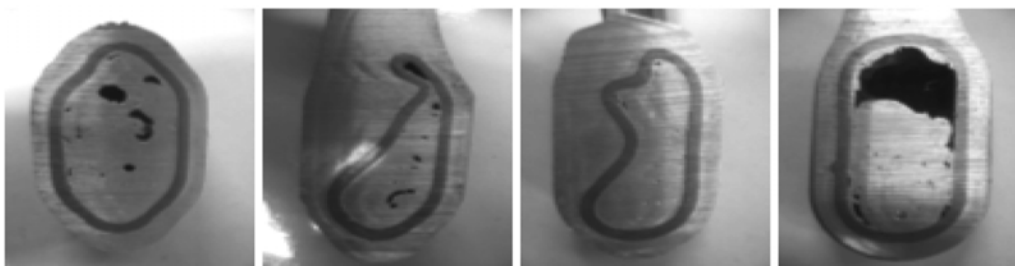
The defects of the molten liquid leakage in the squeeze casting process.
